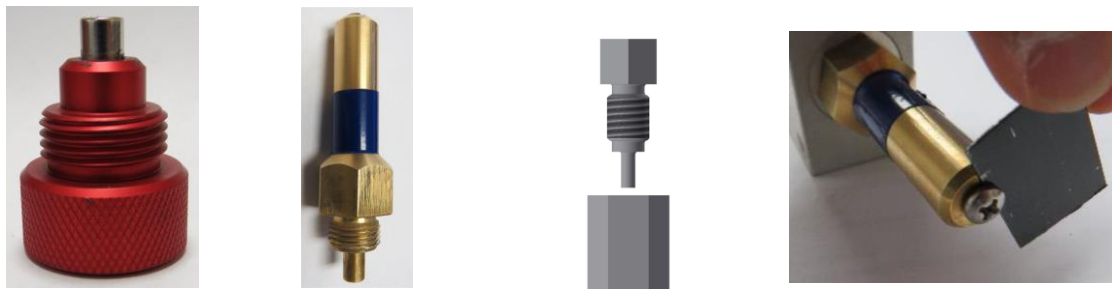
Special tools included in the field inspection tool kit, left to right: Magnetic ball holder, pressure simulator, pin cap tool and pressure simulator shim.
